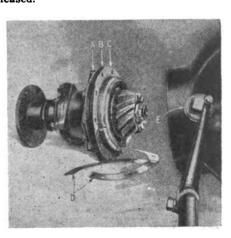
Bevel-drive pinion adjustment. A—Bevel pinion housing.
